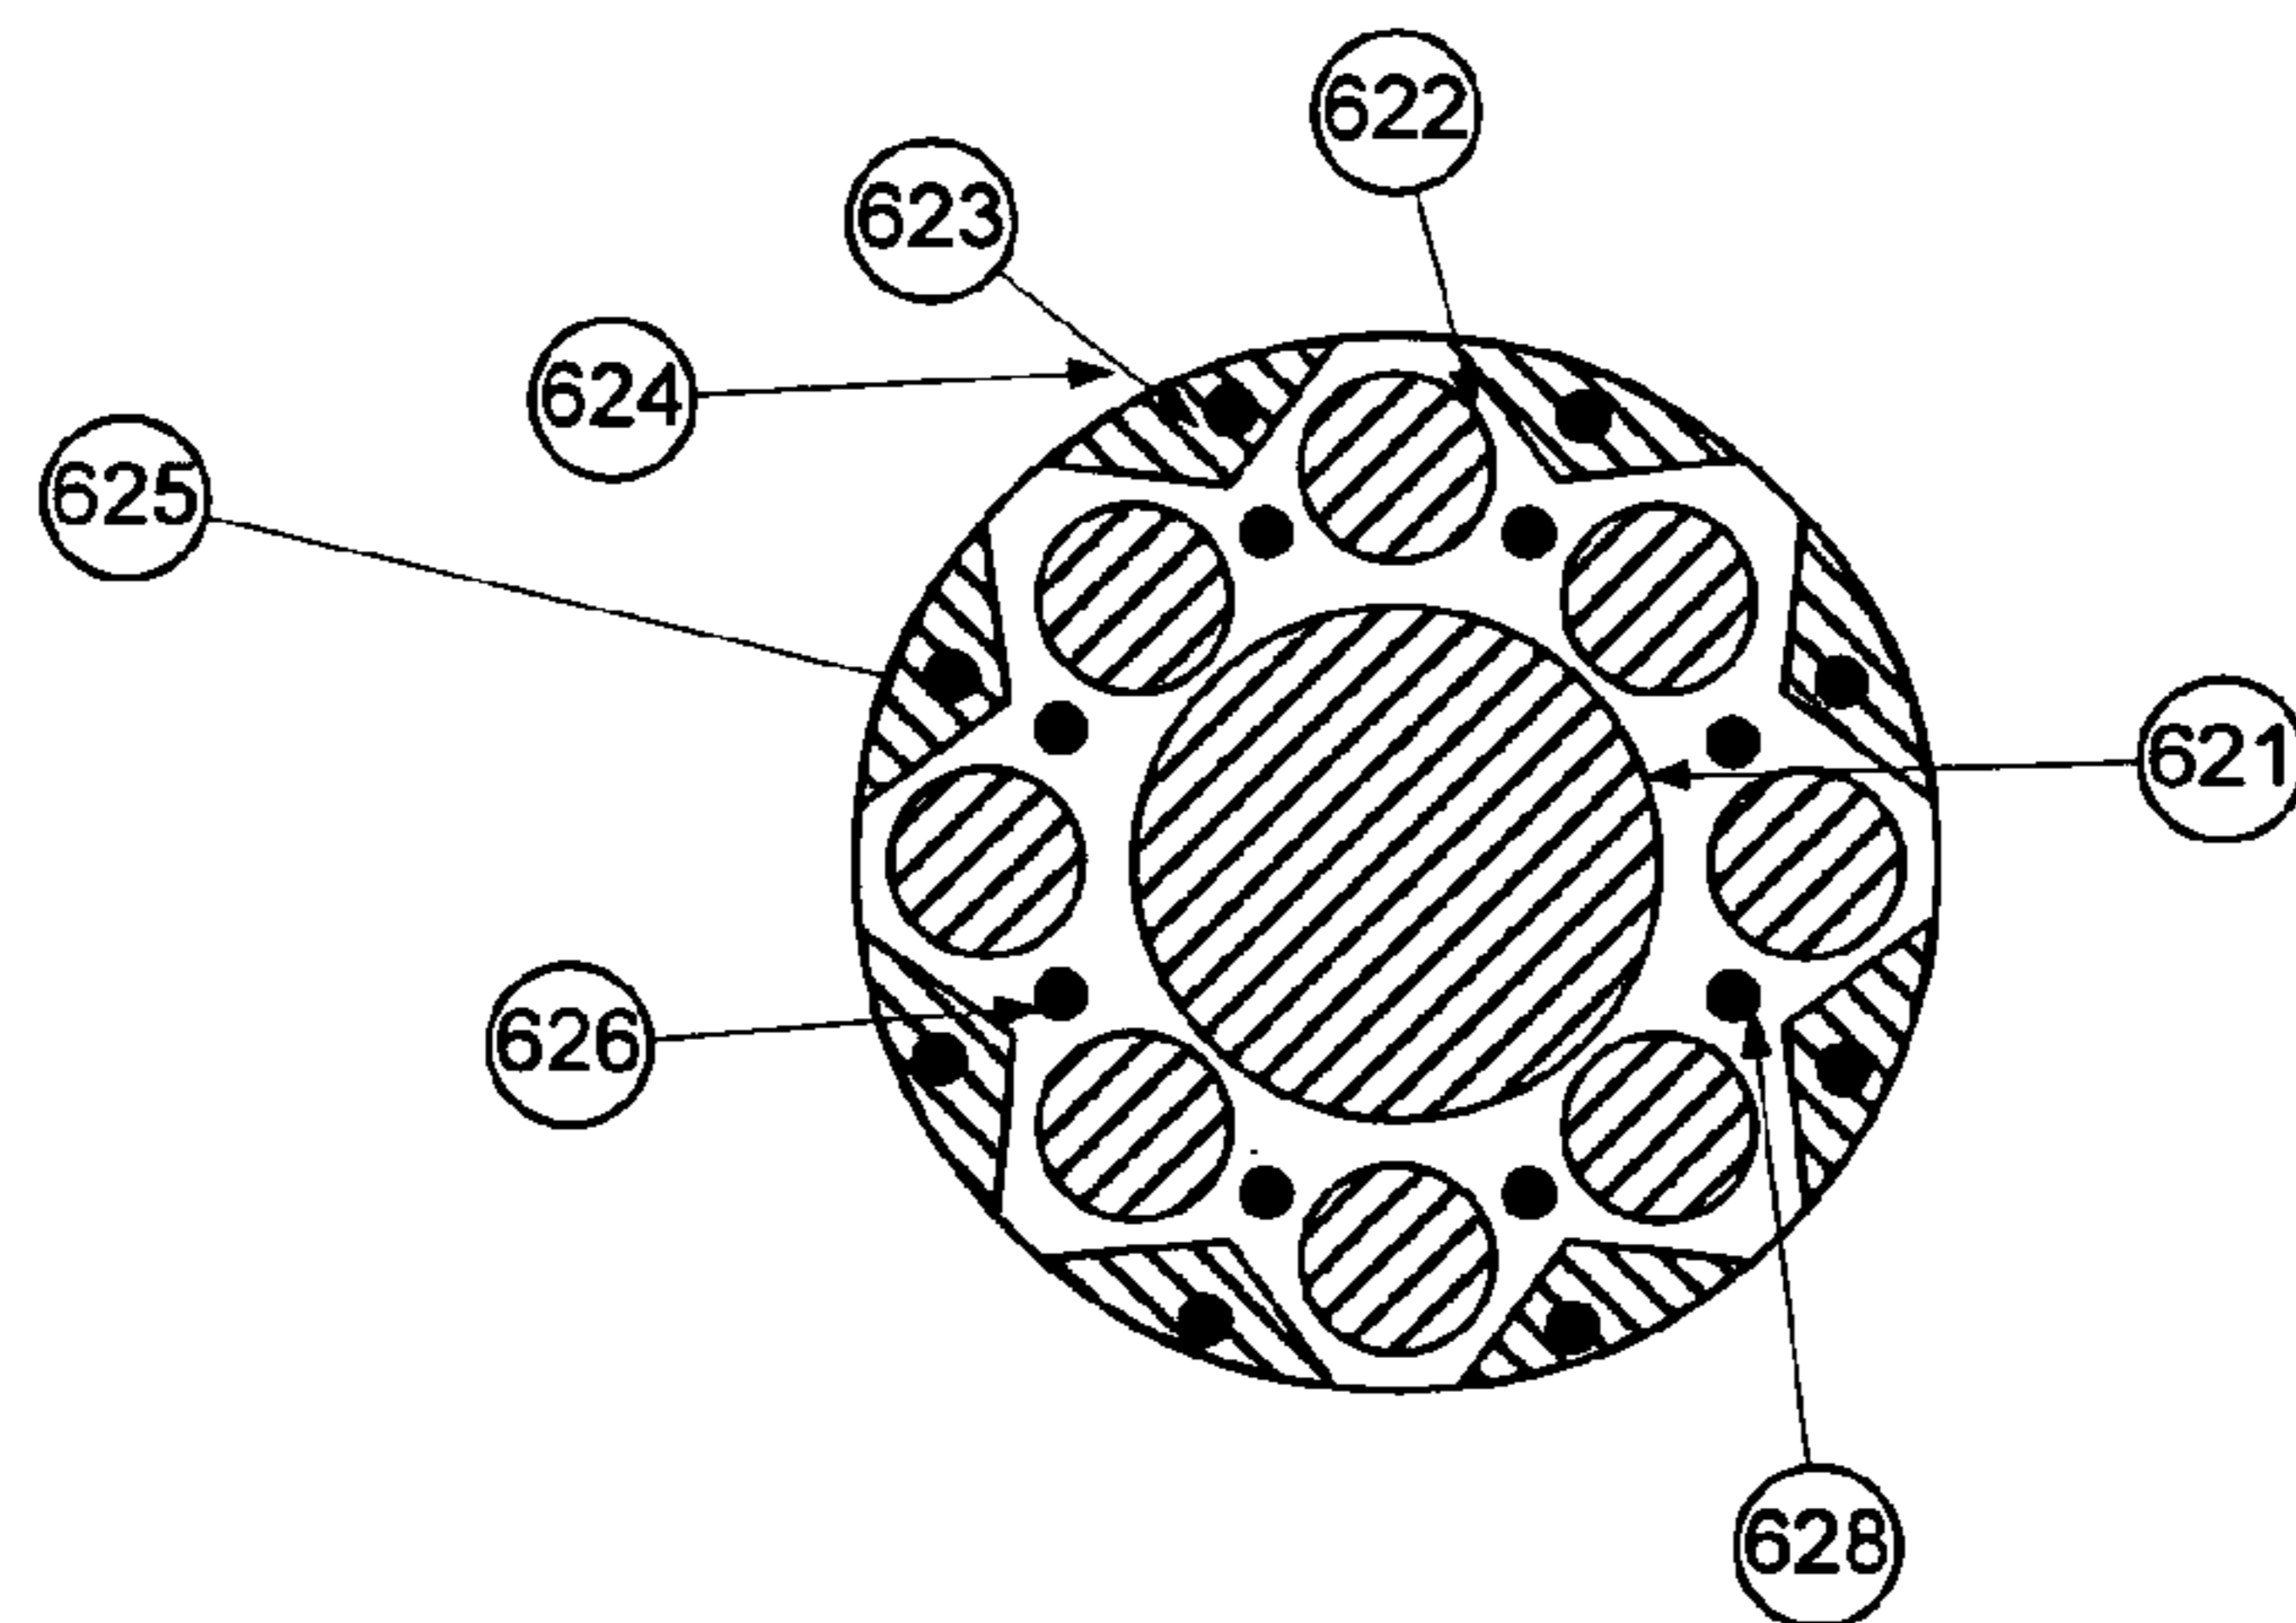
Cross-sectional view of a protective tube layout including a large center tube used as an axial flow baffle
